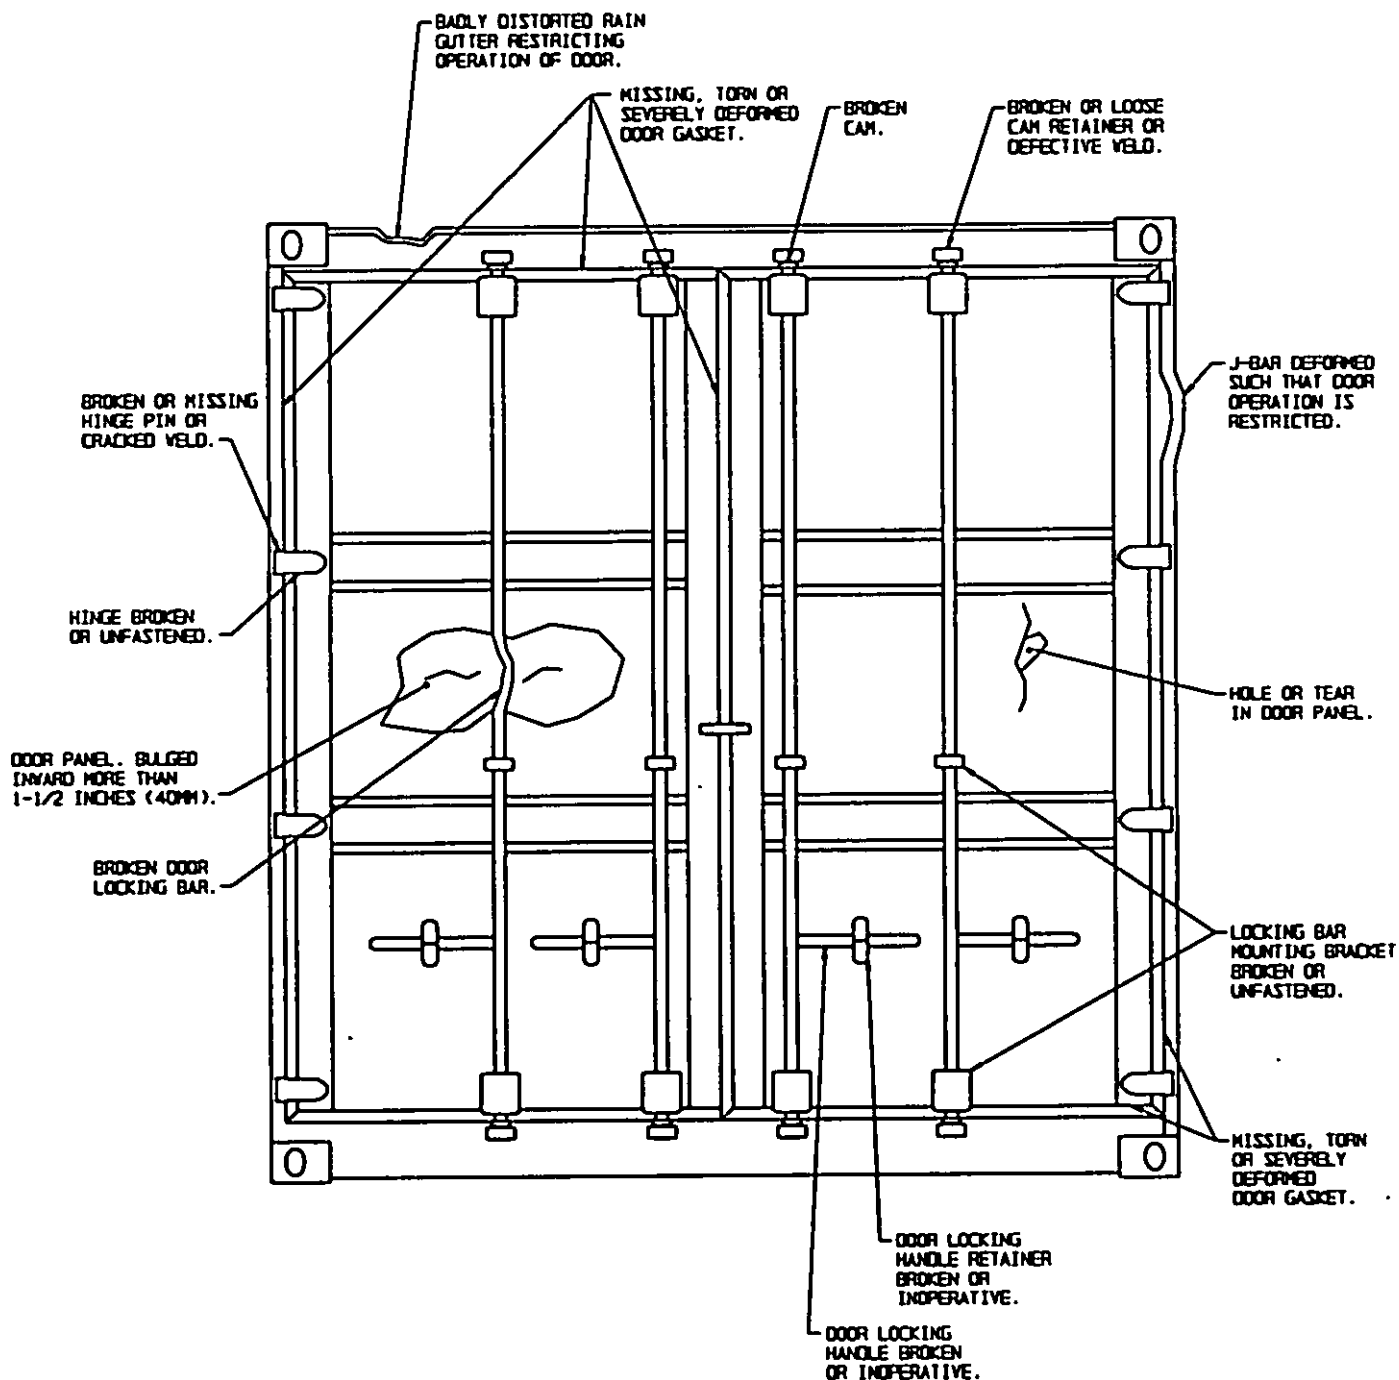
A - REAR END DOOR ASSEMBLY DAMAGE
